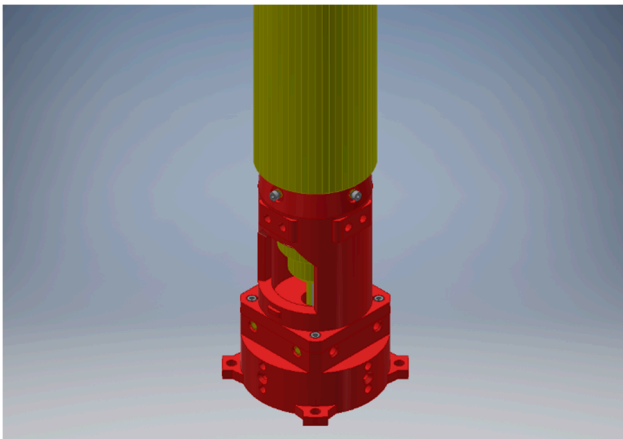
Rendering of assembled middle section of the open-source 3-D printable pelletizer chopper.
